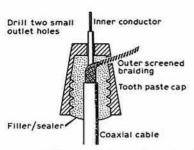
G3MCK's improved method of waterproofing the ends of coaxial cable with reversed toothpaste cap
